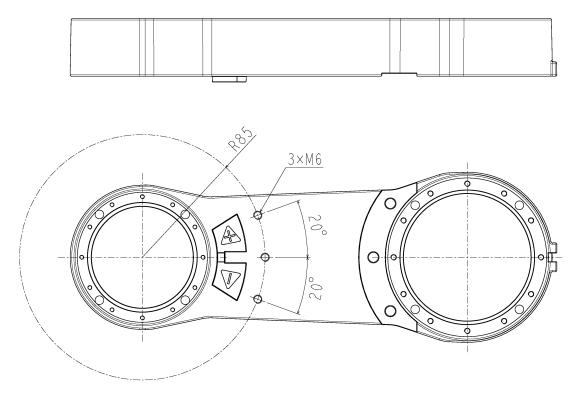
Mounting position of axis-2 mechanical stopper
